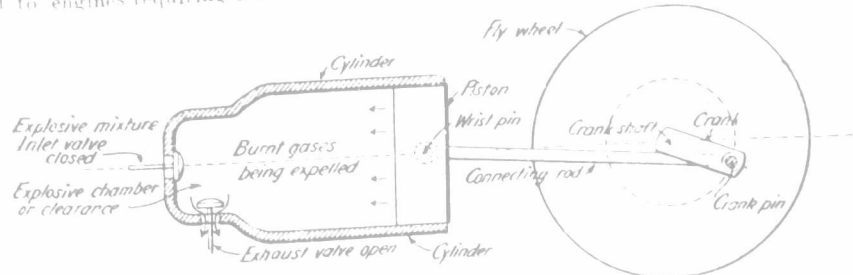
CLEARANCE STROKE: THE PISTON RETURNING TO DRIVE OUT THE BURST GASES. VALVES OPEN.
